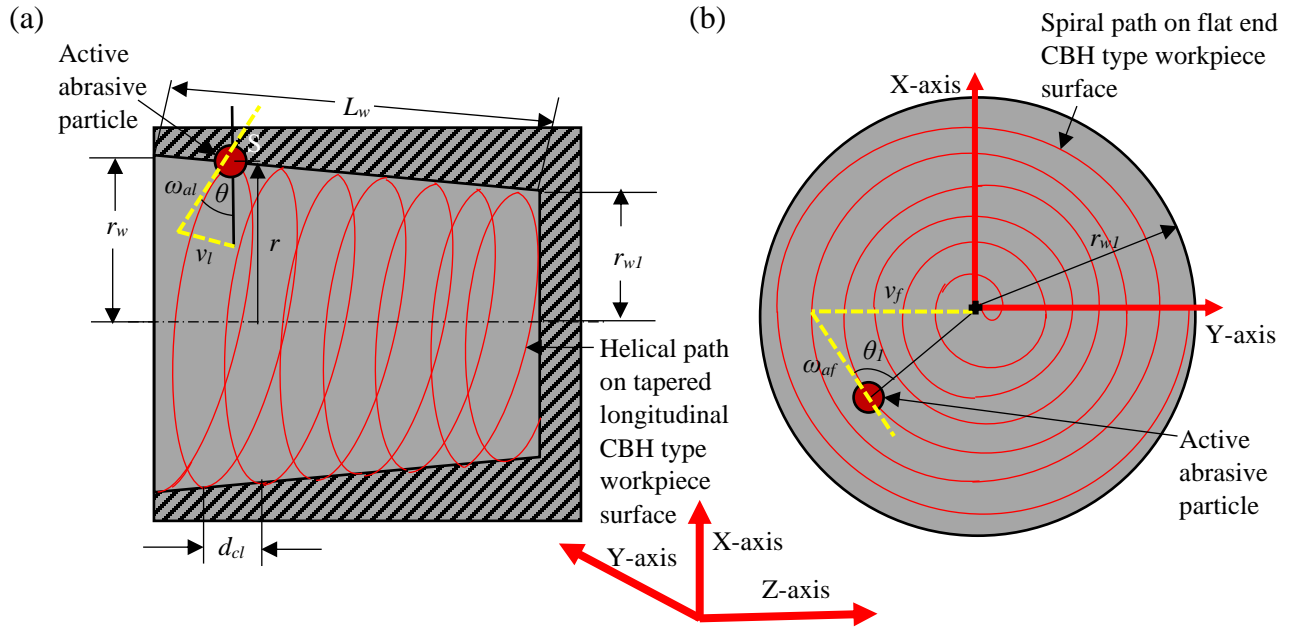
(a) Helical path and (b) spiral path followed by the active abrasive particle (AAP) on the tapered longitudinal and flat end surfaces of the cylindrical blind hole (CBH) type workpiece.
